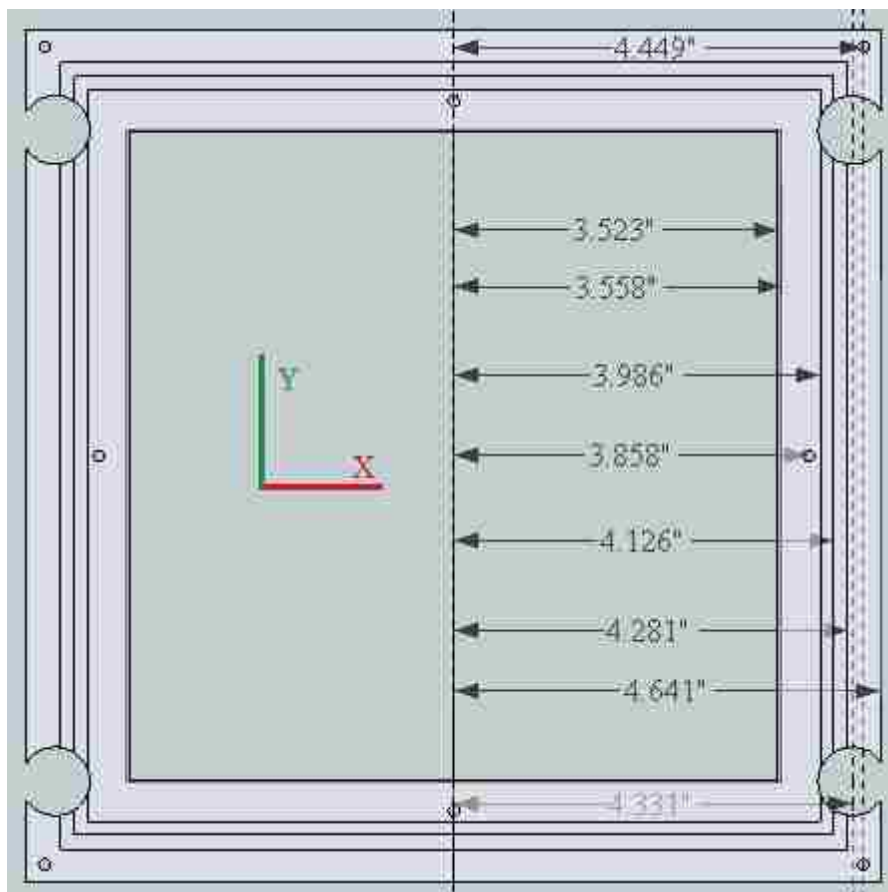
Top view of the 20x20 cm² middle trimmer lead plate illustrating the cross-plane dimension. The middle trimmer is square, such that all non-hole dimensions are equal in the in-plane and cross-plane dimensions.
